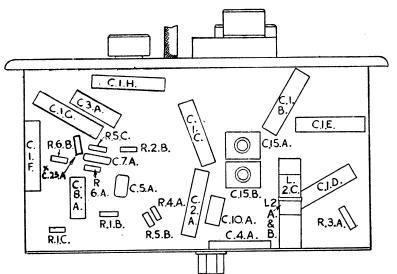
UNDERSIDE VIEW OF CHASSIS
